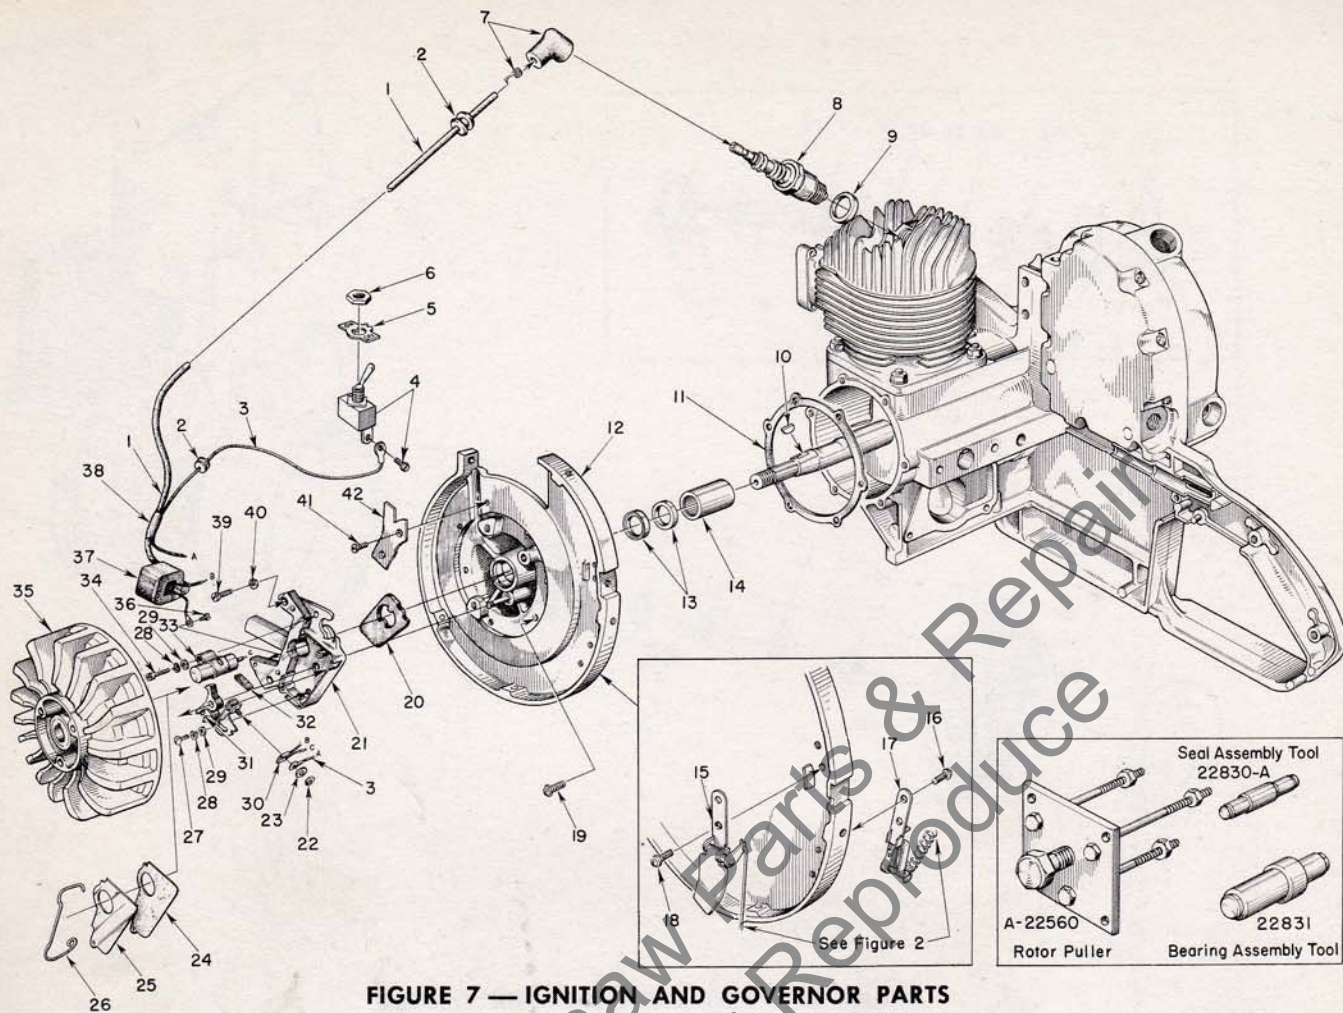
IGNITION AND GOVERNOR PARTS
